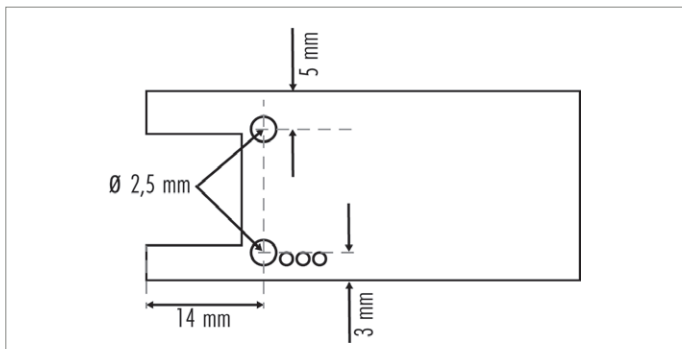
Boring through strip conductors on the universal PCB, plugged batteries
